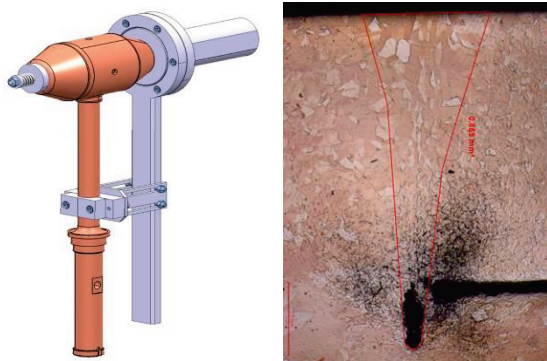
Stage 3: tooling for the cover welding and weld cross section.
